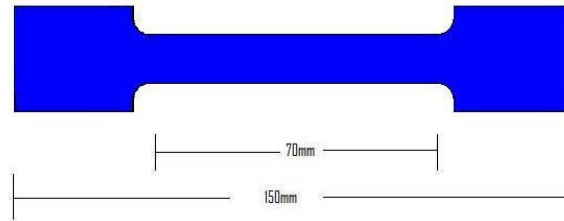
Aluminum dumb-bell shaped samples with dimensions.
